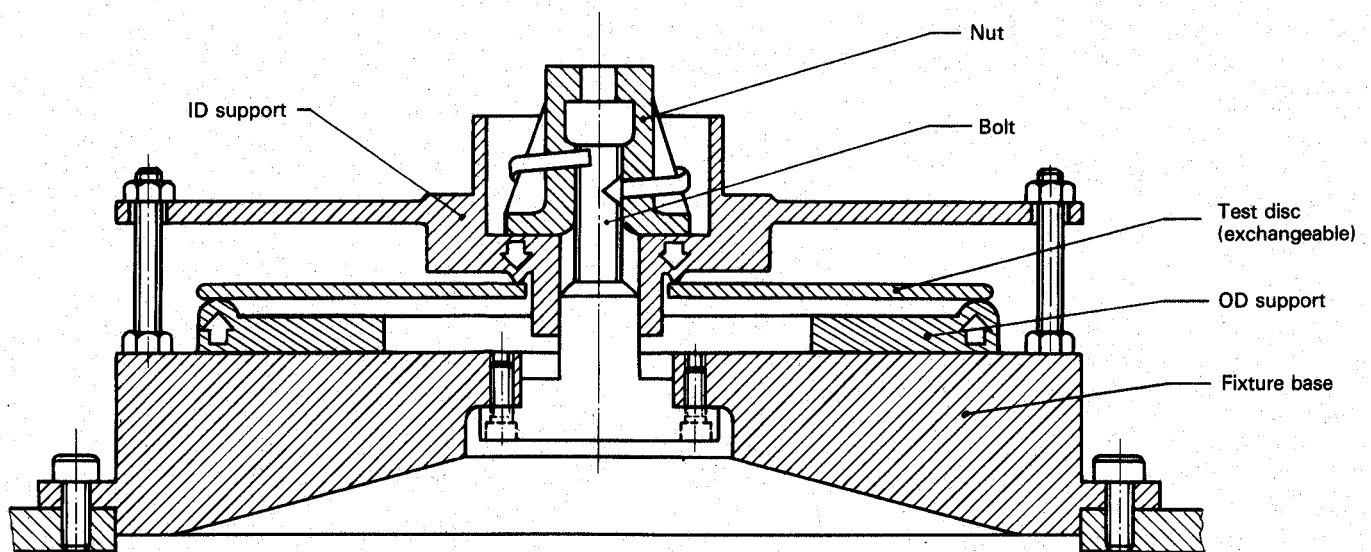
Test fixture for rotary pneumatic assembly tools – Example of design
